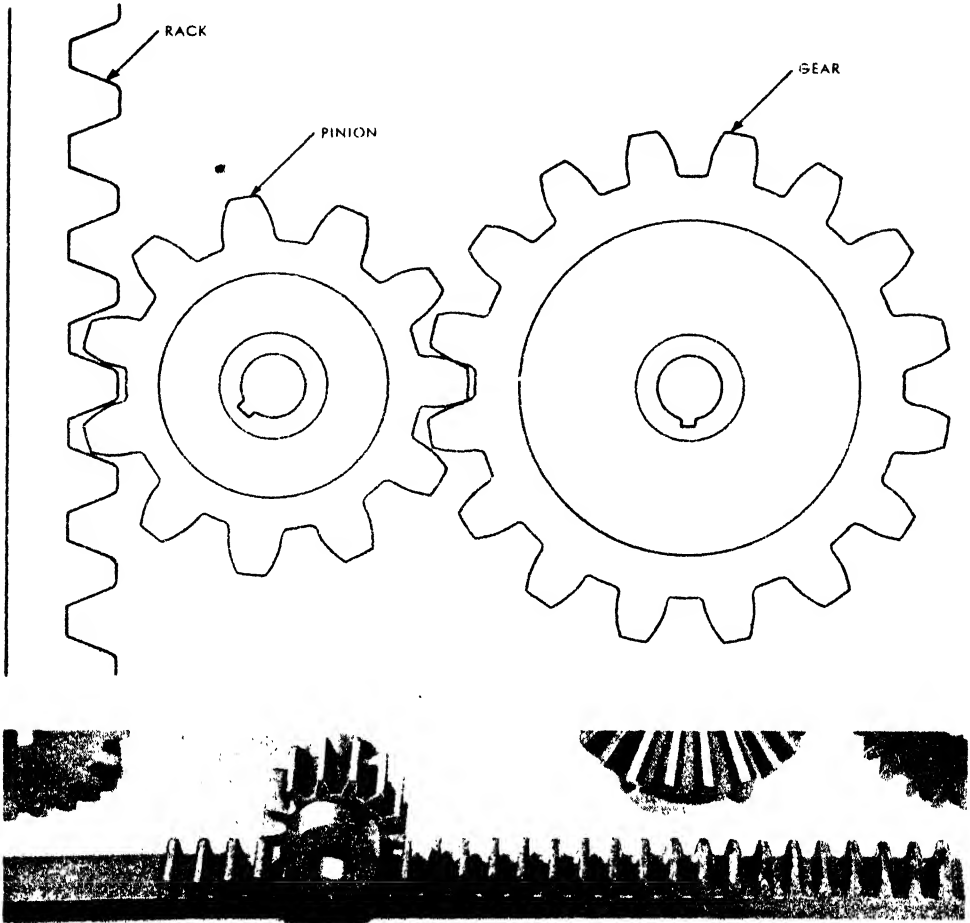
A. INVOLUTE RACK AND PINION GEARS. (Courtesy, Link-Belt Co.)
